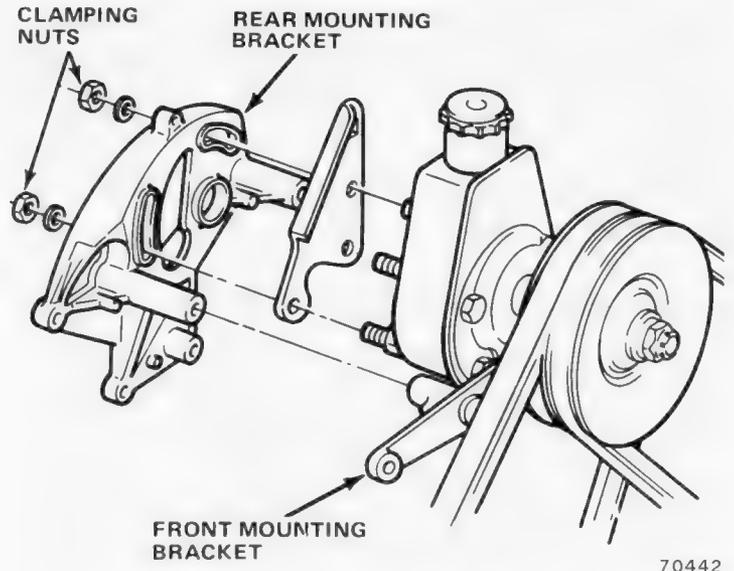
C-20 Power Steering Pump Drive Belt Adjustment—Eight-Cylinder
